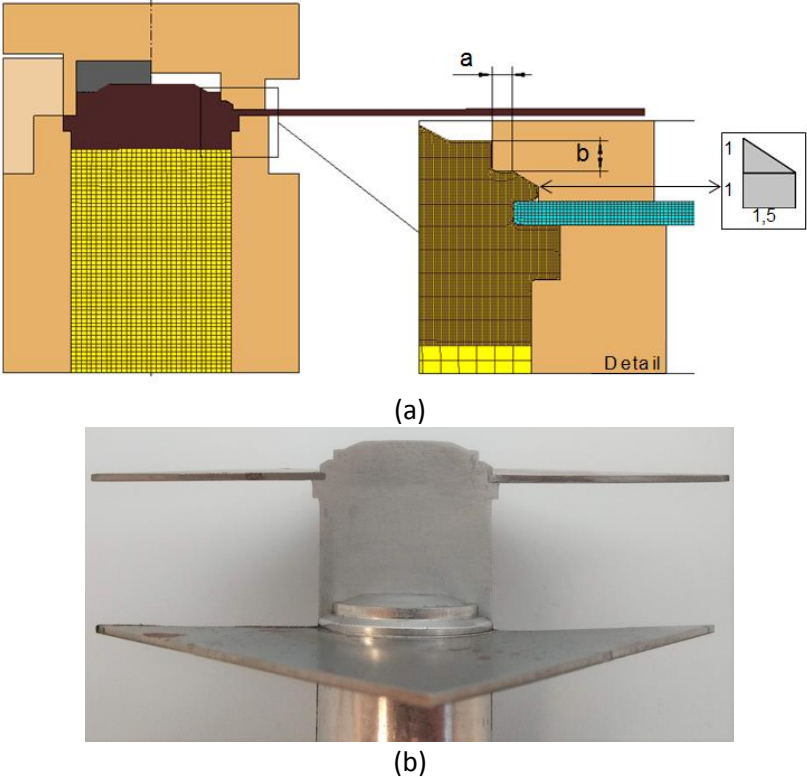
Two stage joining process (a) Finite element modeling of the joining of sheets to rods and die-cavity dimensions [mm] (b) Cross section of the joint of DC04 steel sheet and AW6082-O aluminium rod
